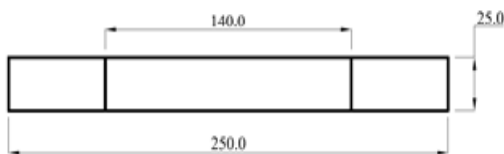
Tensile Specimen Dimensions as per ASTM D-3039
